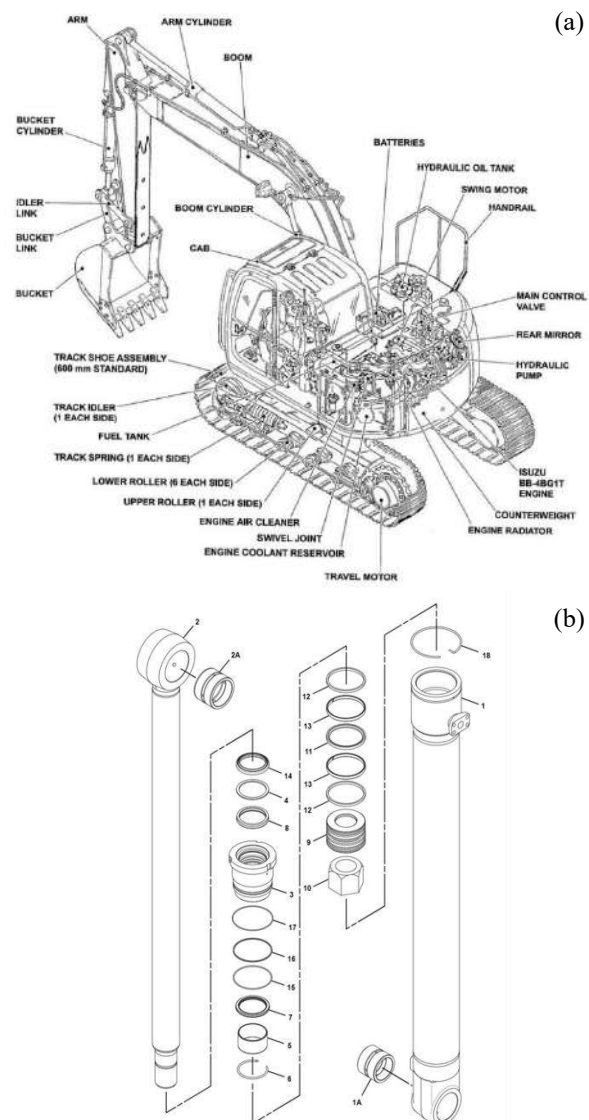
(a) Excavator detail parts, and (b) Hydraulic components of the bucket cylinder.
